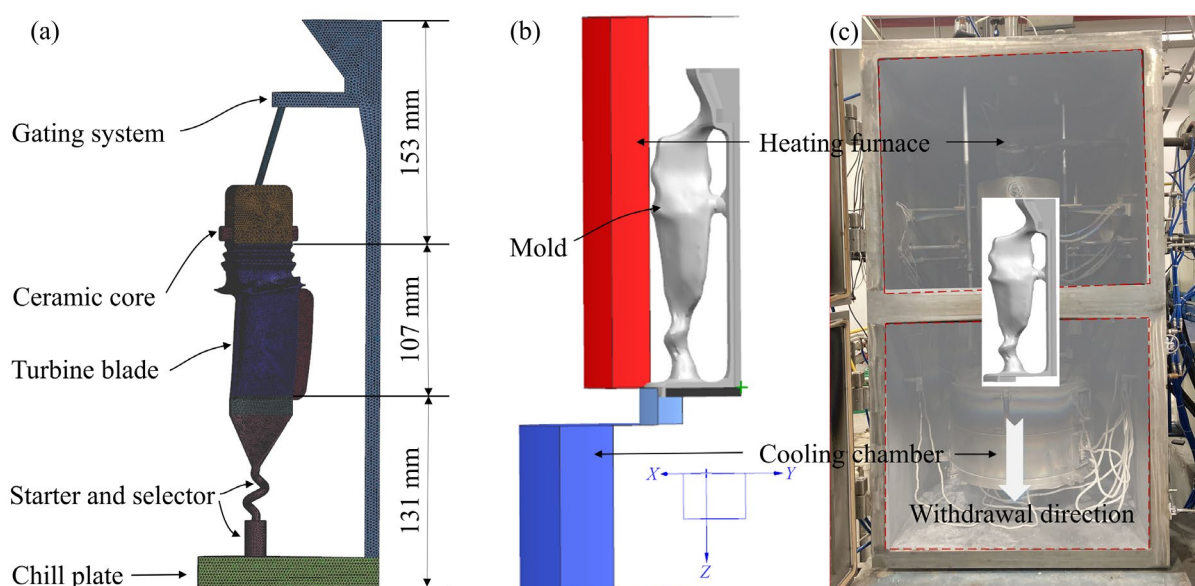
Experimentation and modeling of turbine blade directional solidification: (a) assembly of the casting system including gating system, ceramic core, and grain selector; (b) numerical simulation model; (c) vacuum furnace
